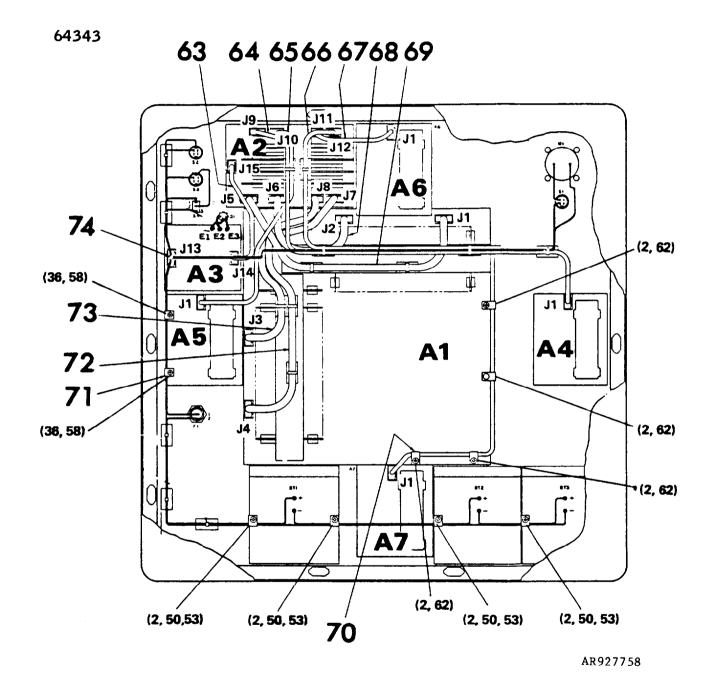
Panel Assembly, Alignment Device, Laser Transmitter: Short Range (sheet 2 of 2)
